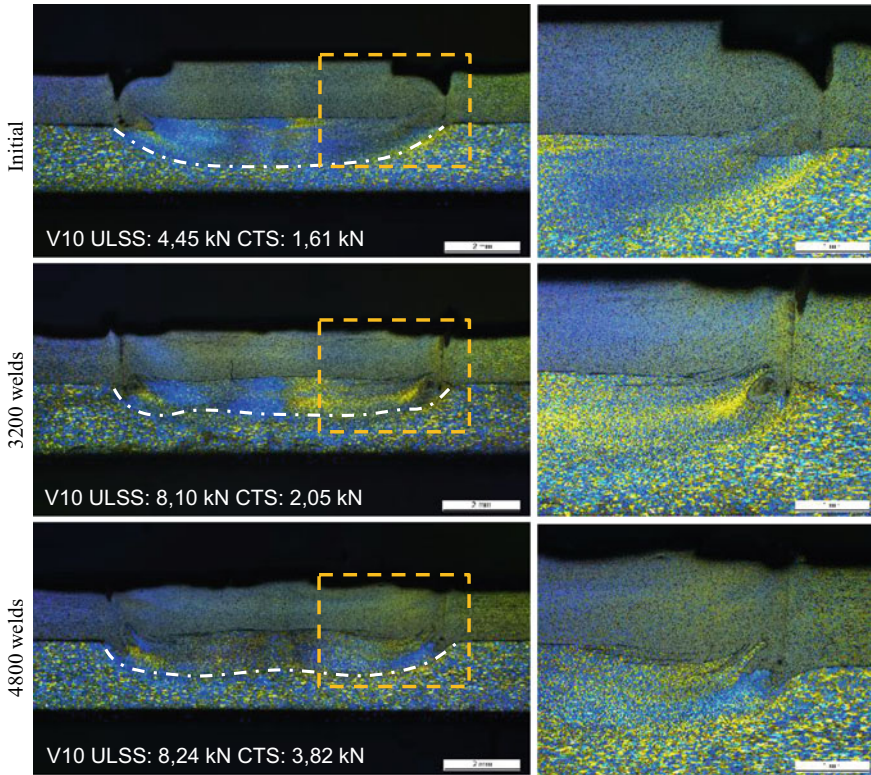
Cross-section of experiment 10 at the initial state of the tool and after 3200 and 4800 welds
